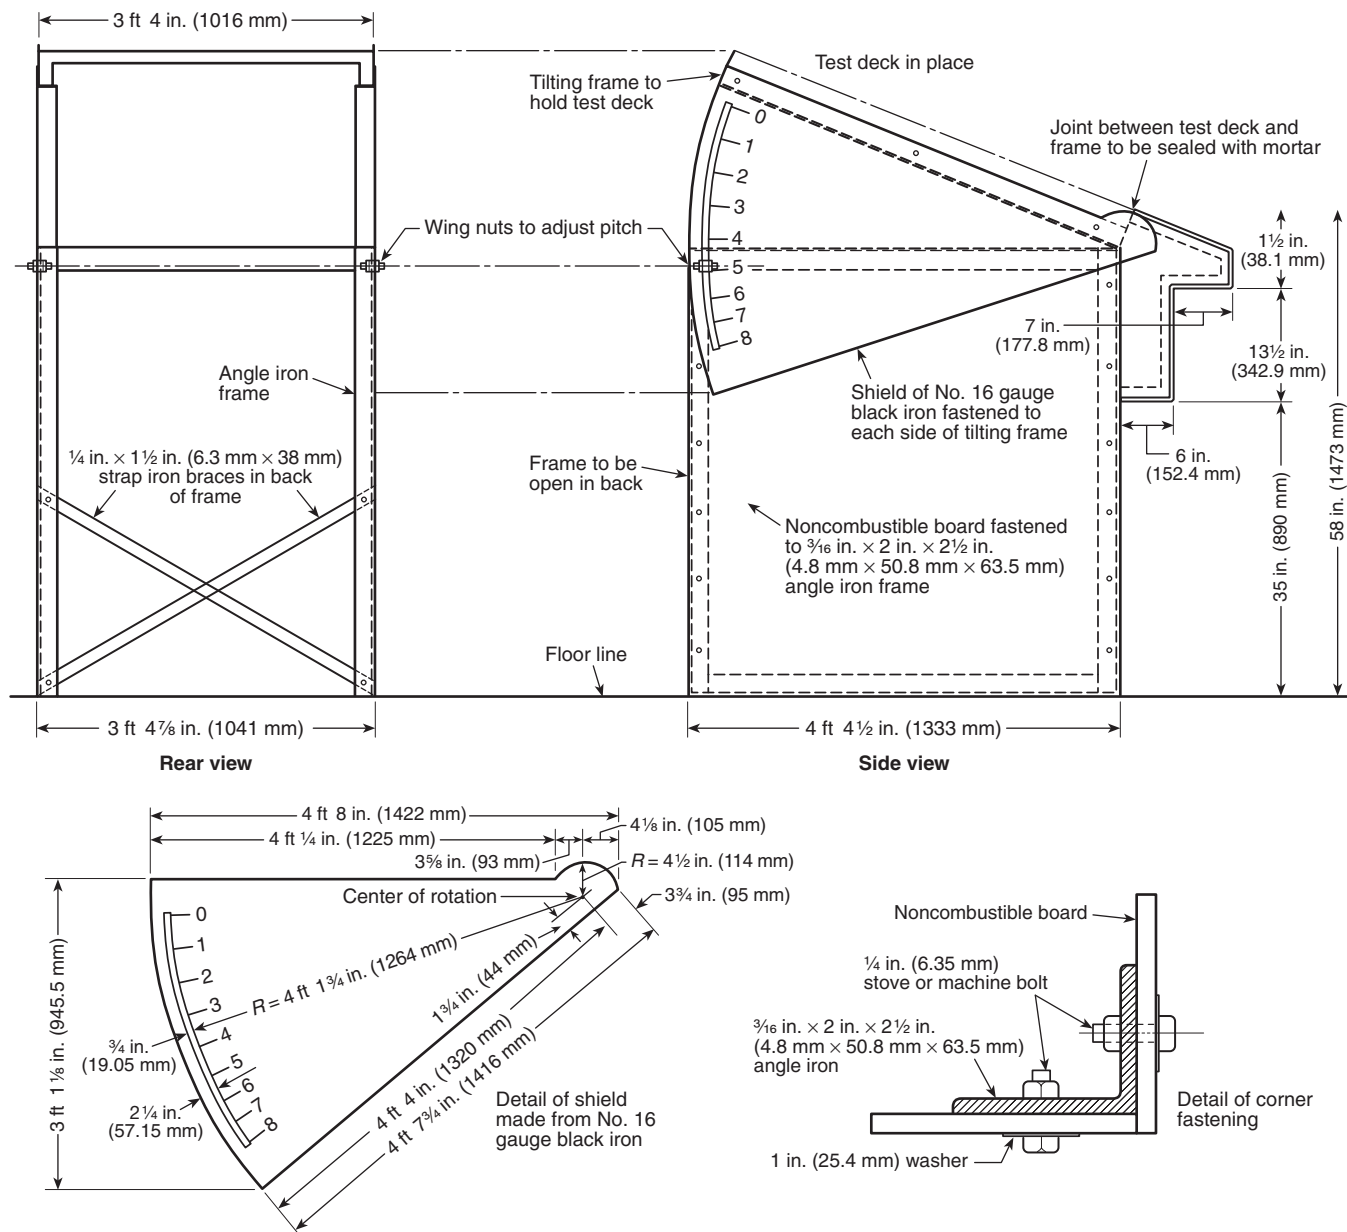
(b) Detail of tilting frame to hold test roof deck.
